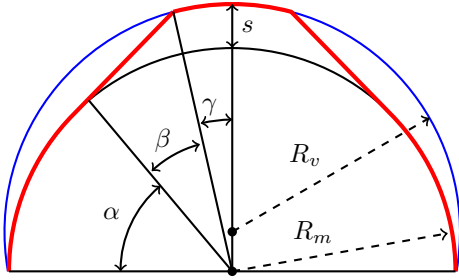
Vessel welding with a welding shim of thickness s . γ is the angle where the vessel gets in contact with the magnet, and β the angle where the welding shim ends. The vessel is shown in blue, the magnet in black, and the final shape after welding in red.
